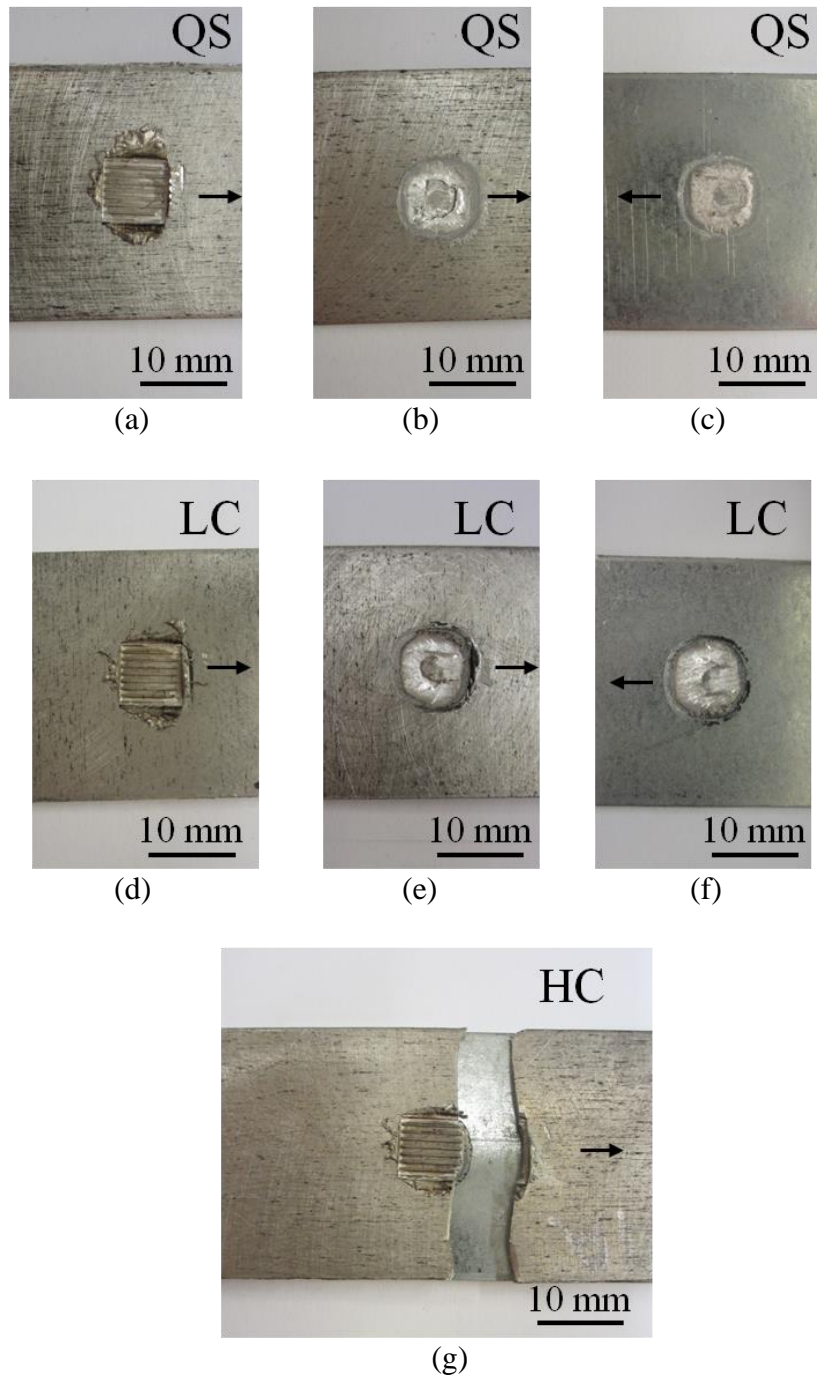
(a) A top view of the magnesium sheet, (b) a bottom view of the magnesium sheet and (c) a view of the steel sheet after quasi-static testing. (d) A top view of the magnesium sheet, (e) a bottom view of the magnesium sheet and (f) a view of the steel sheet after (low cycle) cyclic loading with 5.7×10^3 cycles under a load range of 3.20 kN. (g) A top view of the weld after (high cycle) cyclic loading with 3.08×10^4 cycles under a load range of 1.91 kN. The loading direction is shown schematically with arrows.
